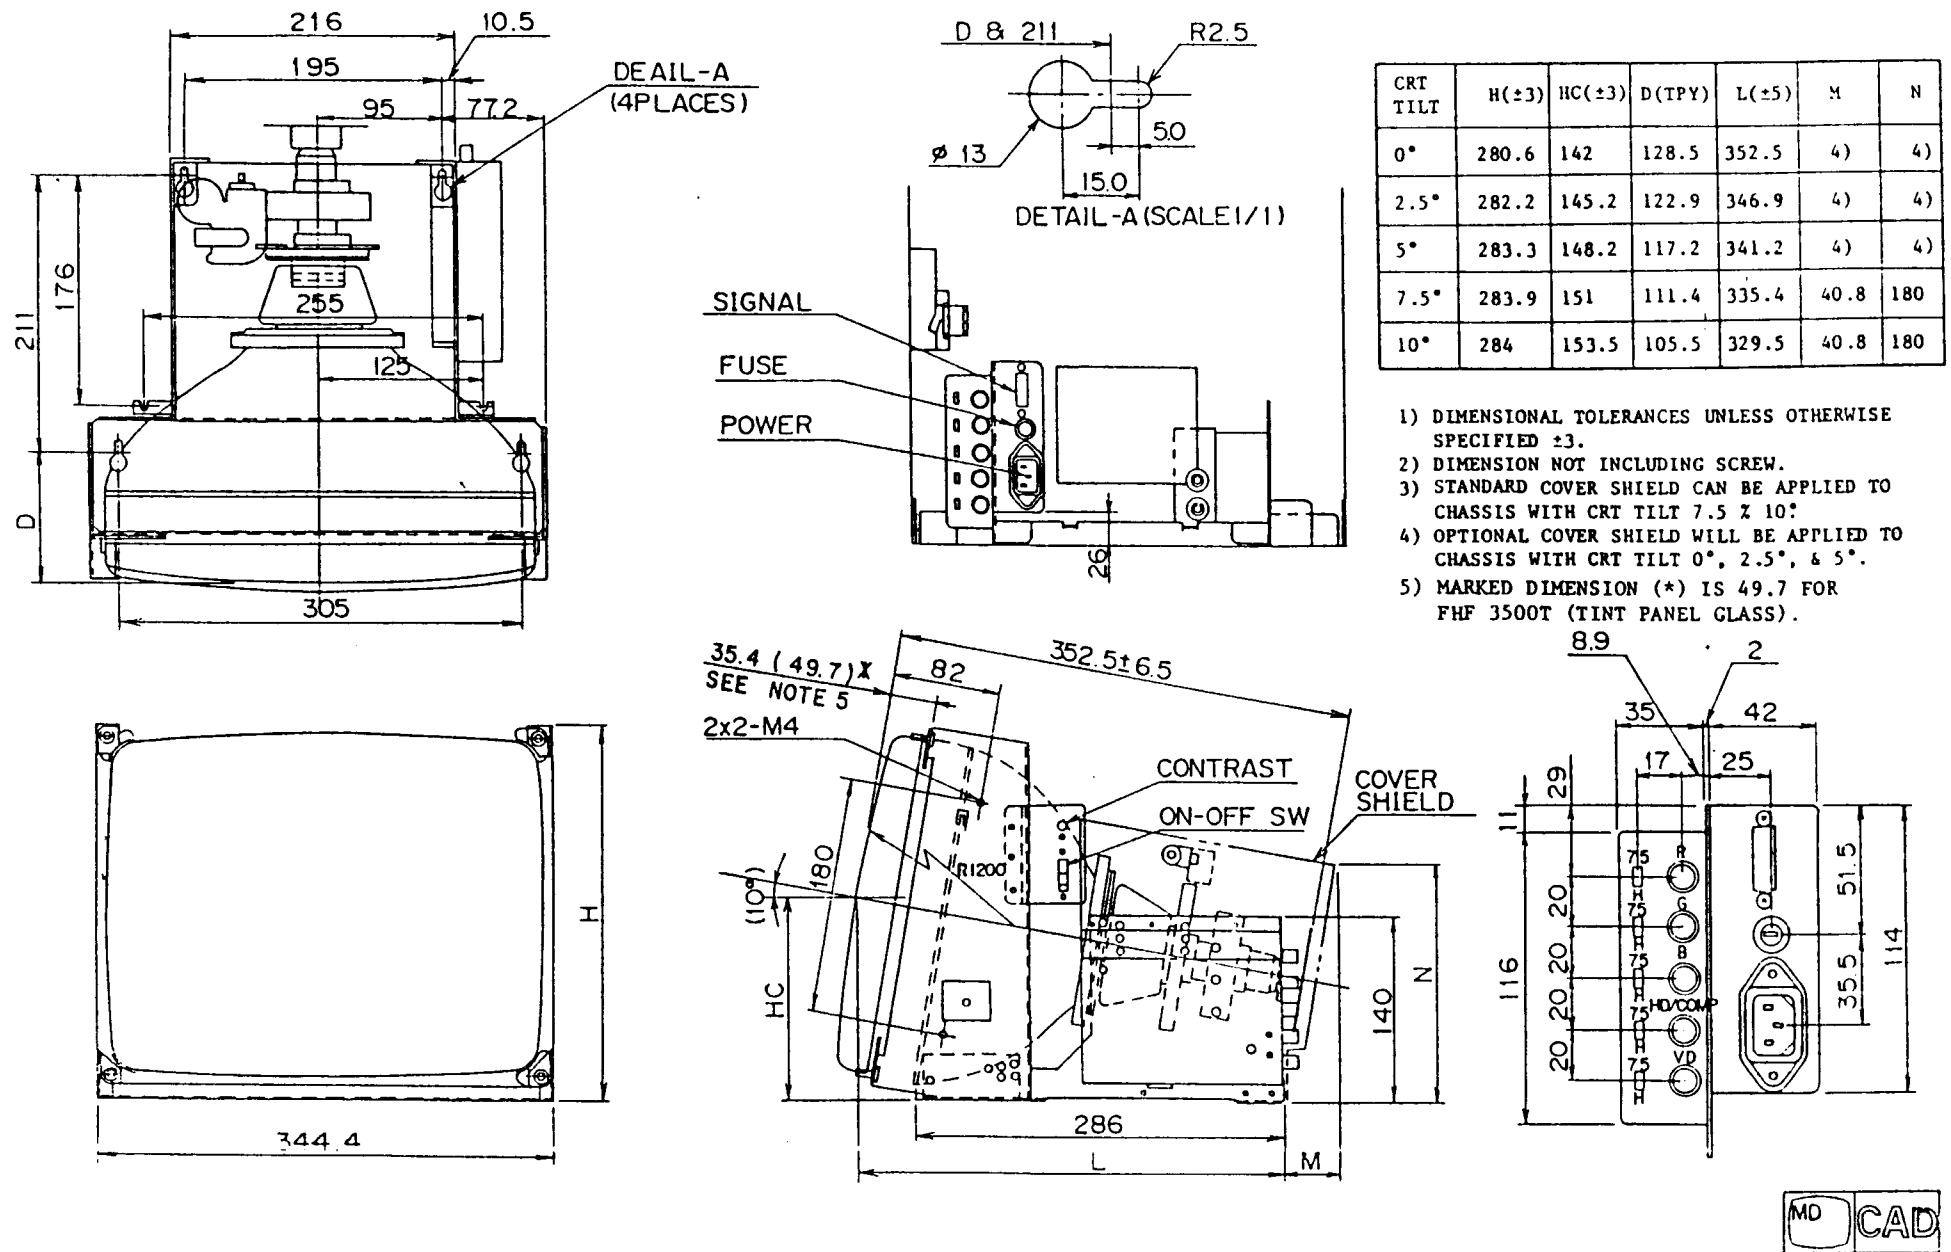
Outline of Chassis (FHF3500/2500/1500)
